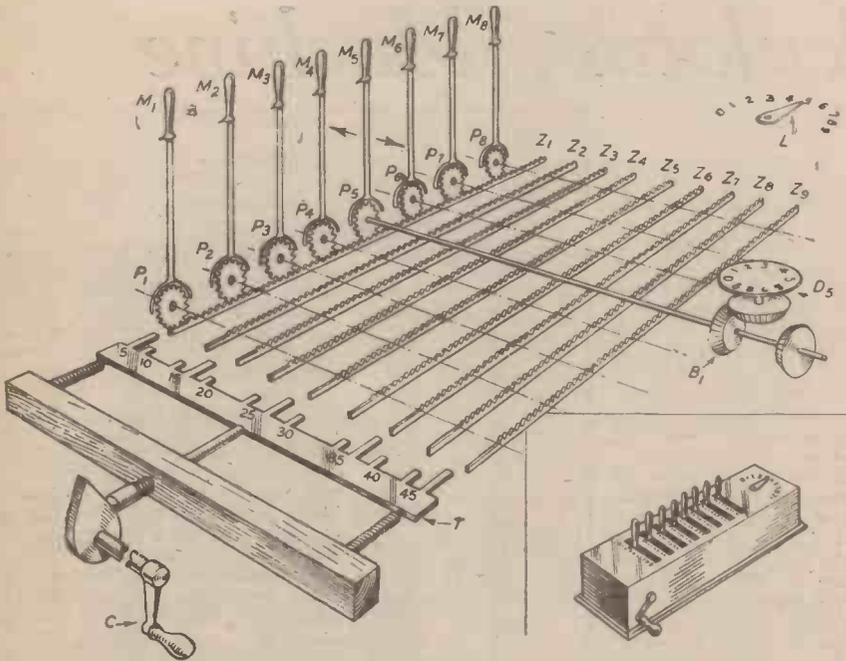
Simplified mechanism of the Millionaire machine. (Inset exterior view.)
